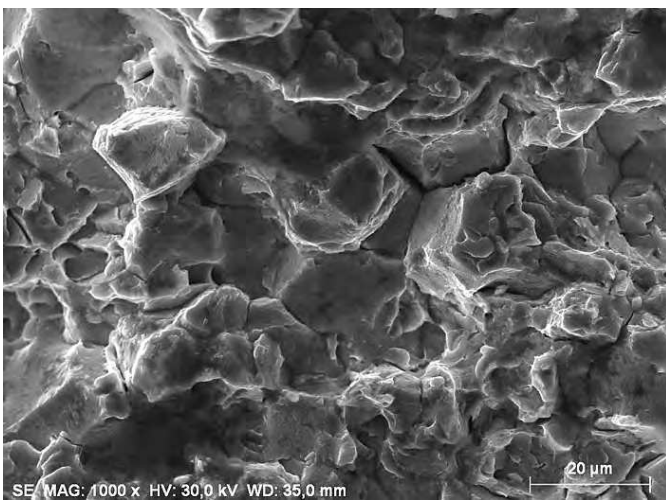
Scanning electron microfractograph of disc spring's fracture surface, Secondary electron image. Note predominant intergranular fracture.
